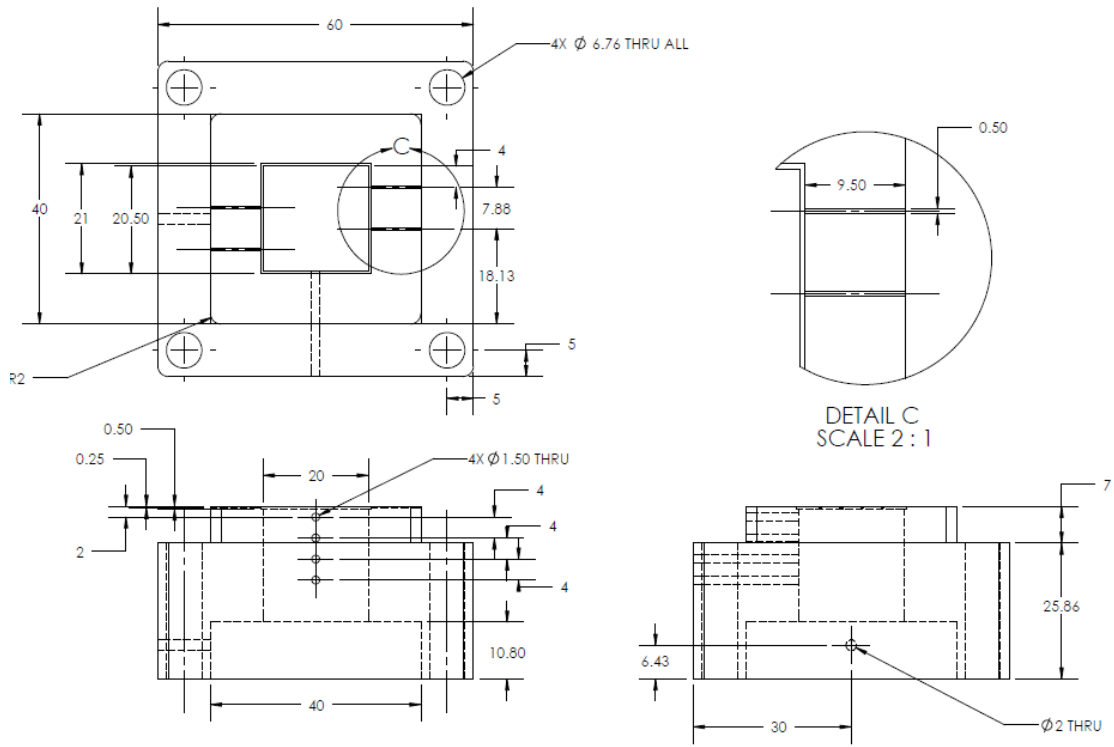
CAD drawing of the insulation block (all measurements in mm).
